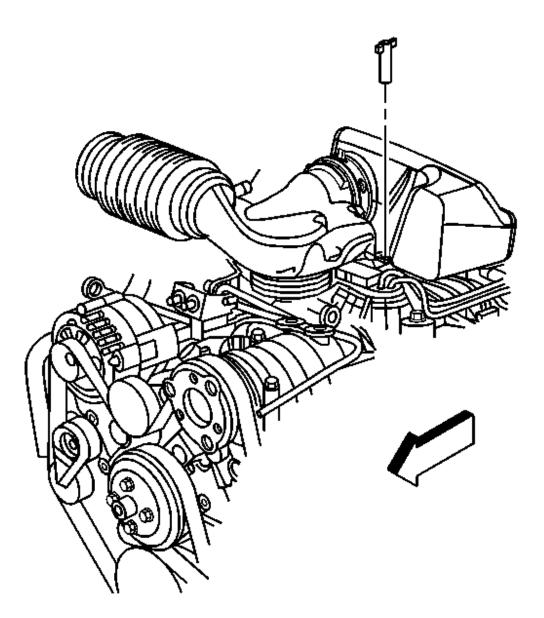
View Of Air Cleaner Adapter Nut Courtesy of GENERAL MOTORS CORP.
